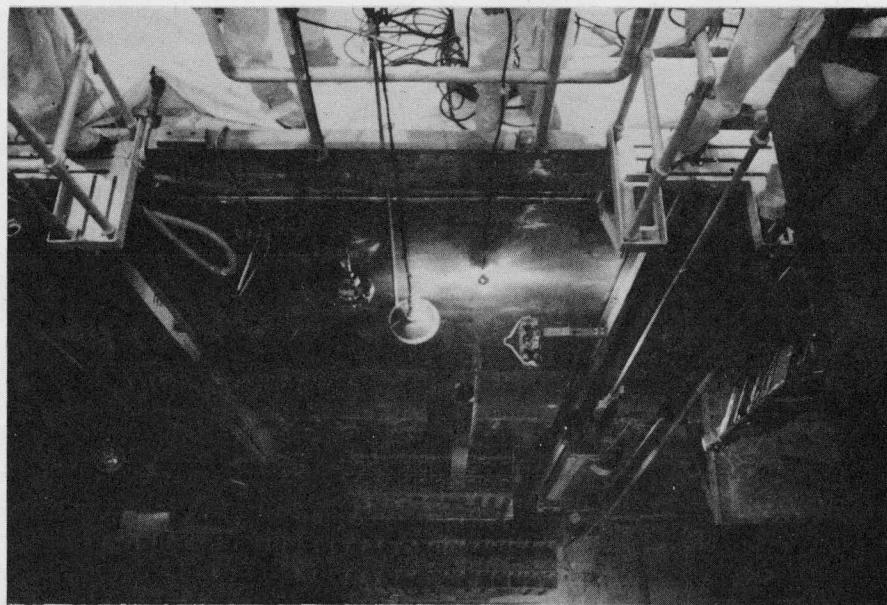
Equipment and Fixtures for Lower Tie Plate Drilling by EDM (Fitzpatrick)
